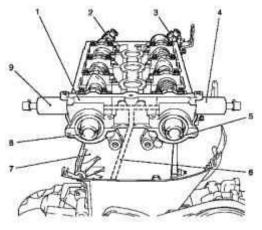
The head of the cylinder block by block poshipnika bridge cam: 1 - block the bridge bearing camshaft, 2 - position and connection of the sensor camshaft drive intake valves, 3 - position and connection of the sensor camshaft drive of the exhaust valves, 4 - valve adjust camshaft drive of the exhaust valves, 5 -- camshaft drive of the exhaust valves, 6 - oil slide in the cylinder head; 7 - cylinder head, 8 - camshaft drive intake valves, 9 - regulating valve camshaft drive the intake valves
